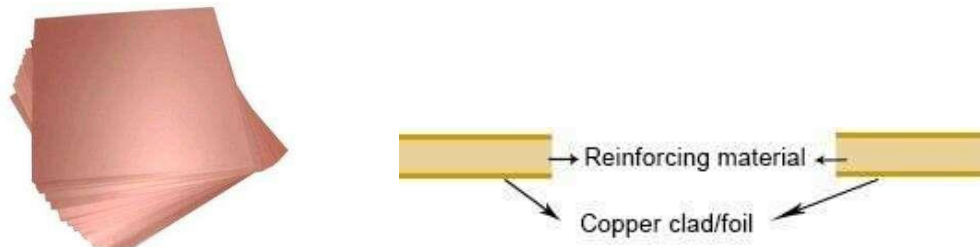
A set of CCL boards and the construction of a CCL board
